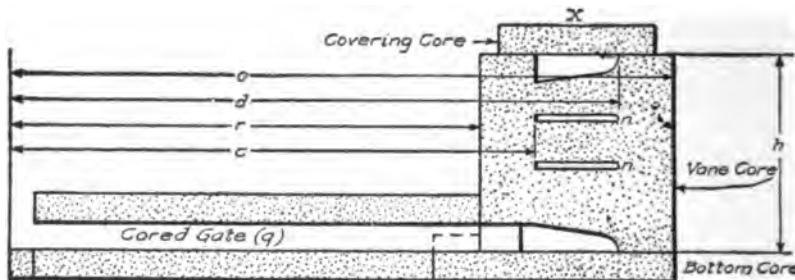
Radial Section of Guide-Ring Core on Line //, Fig. 273
